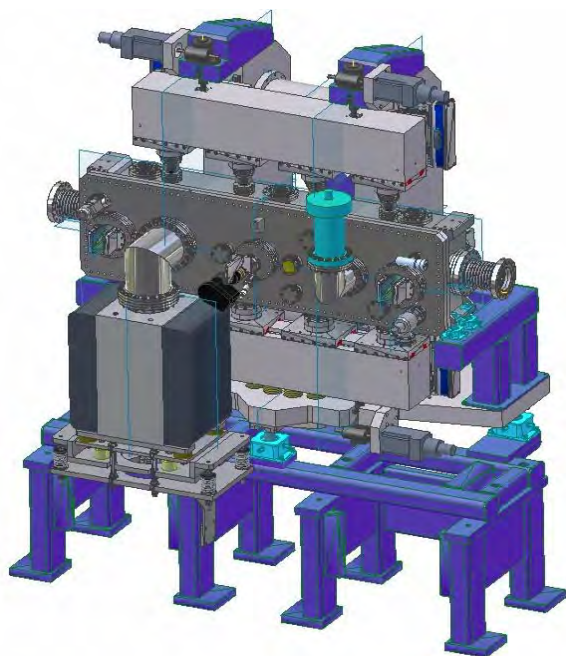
Front view of the 39-port chamber in the middle of CPMU assembly.
